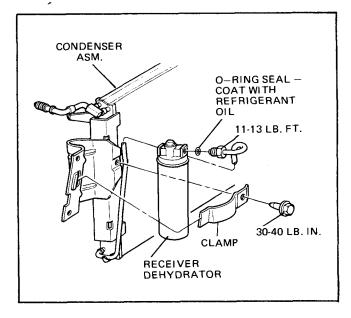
A-113 Receiver Dehydrator Mounting - A and G Series
